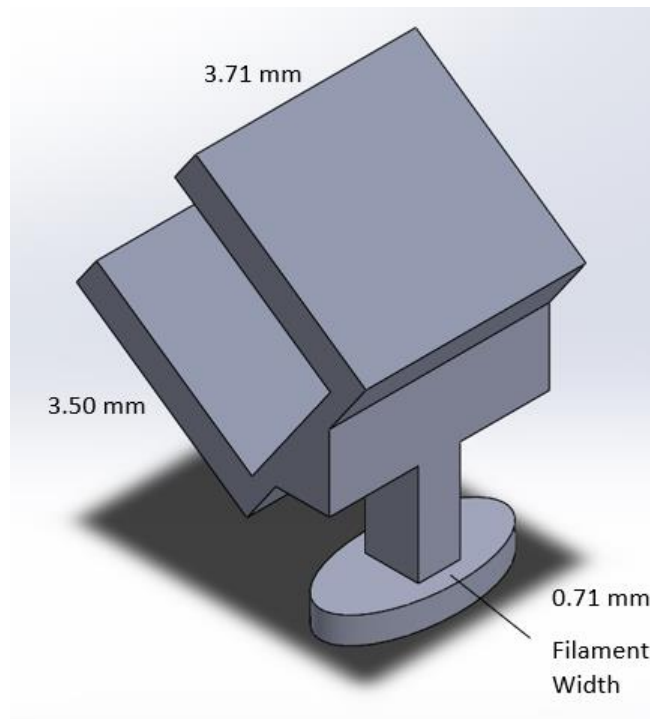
SolidWorks rendering of camera attachment. The oval piece on the bottom of the part can be inserted into ports on the camera mount, allowing it to be turned and locked in place.
